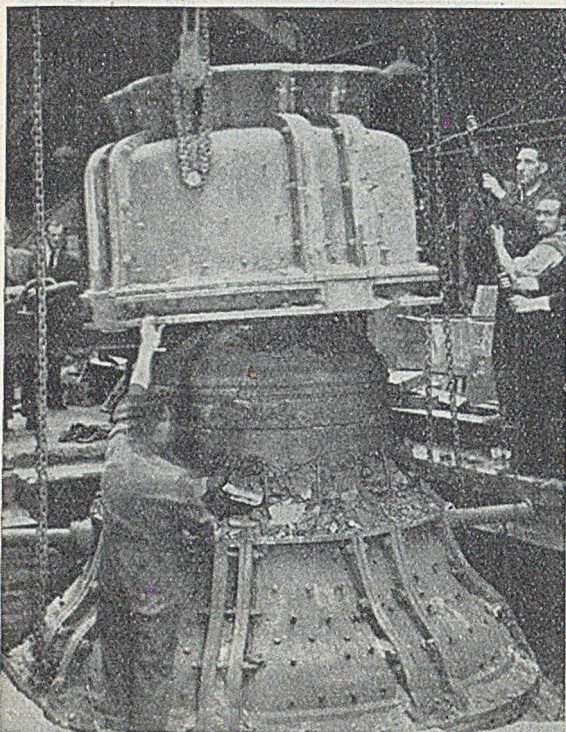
Stripping the Mould after casting the "Freedom" Bell at the Works of Gillett & Johnston, Croydon.
